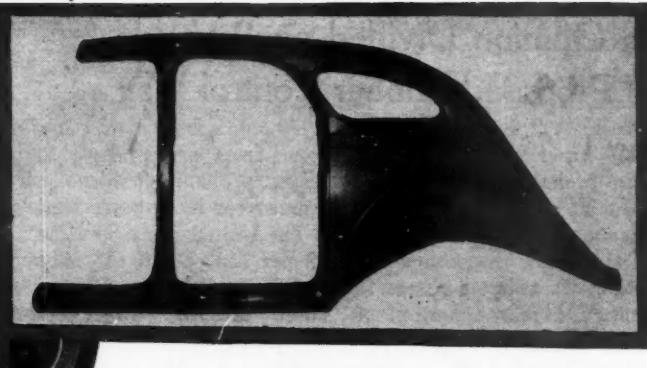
Left side panel for Chrysler Imperial Airflow body is made in two sections joined by arc-welding about midway in the rear door opening
